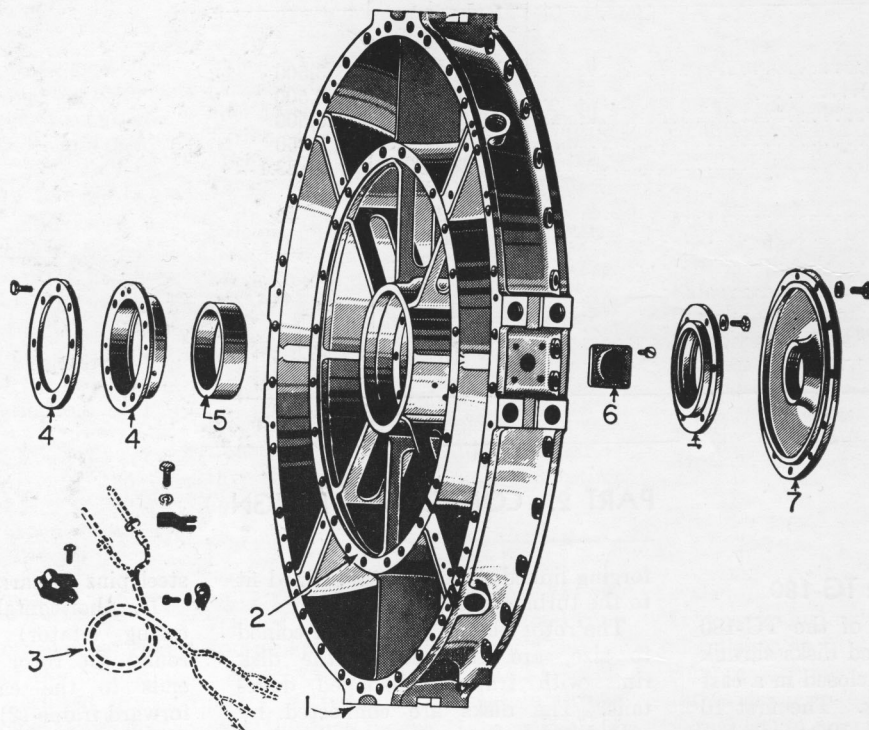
The forward frame assembly of the TG-180 consists of: (1) lower trunnion; (2) flange for bolting gear casing; (3) bearing thermocouple; (4) No. 1 bearing housing; (5) bearing outer race—inner race is assembled on rotor; (6) screen for air vent openings; (7) bearing oil seals.
